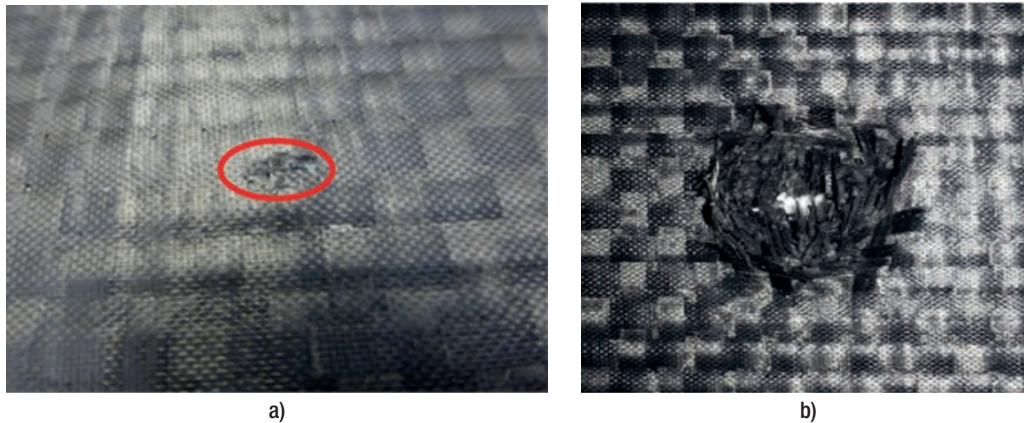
Impacted samples: a) U=10J; b) Penetration
